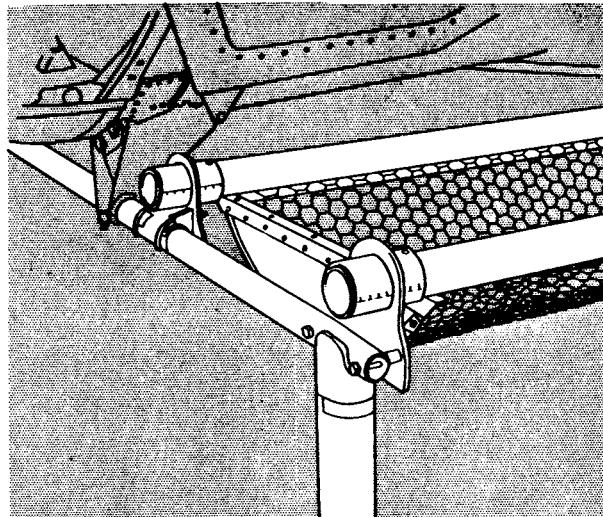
Typical cargo rack installation No. 1 (showing attachment detail).
